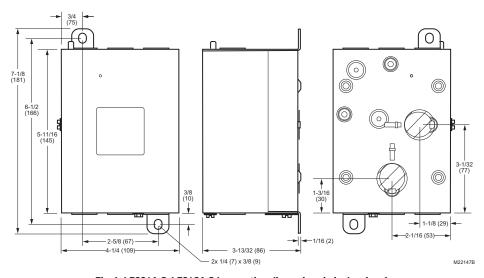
L7224A,C; L7248A,C,L mounting dimensions in inches (mm).
